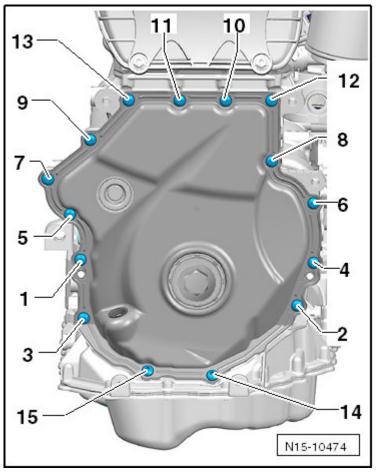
Identifying Lower Timing Chain Cover Bolts
